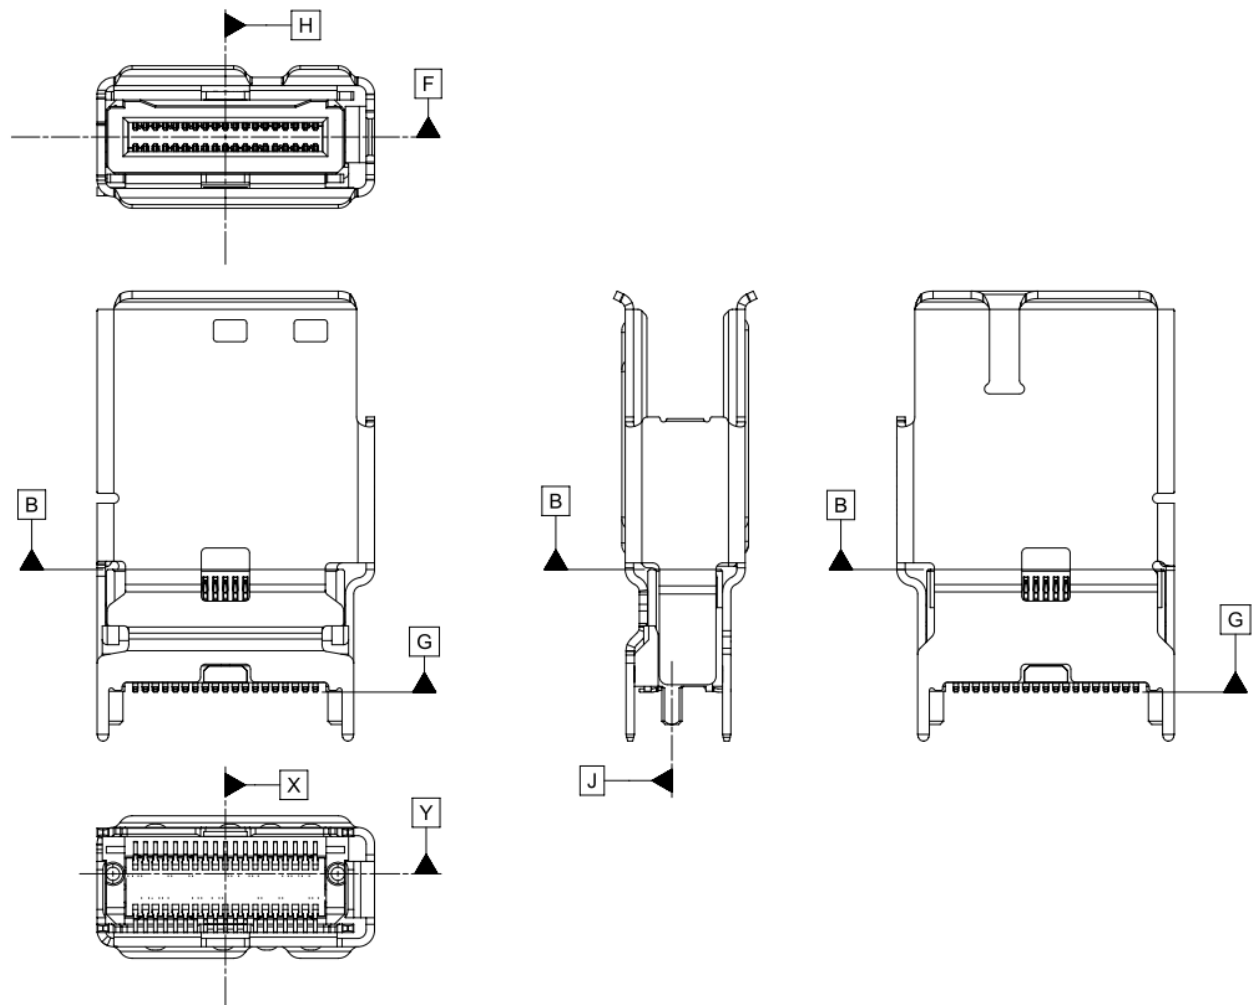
38-Pin Style B Connector Receptacle Datum Definitions
